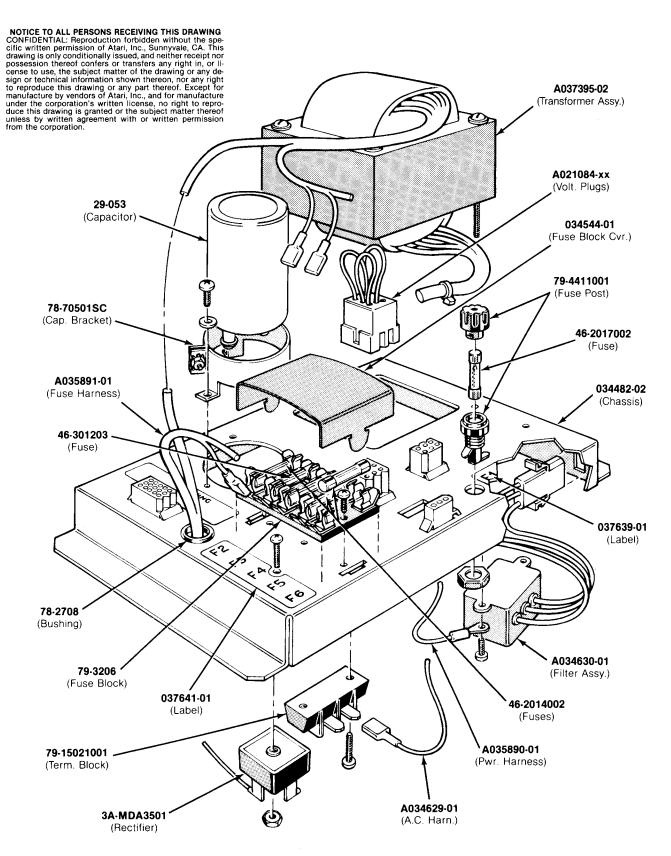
Shielded Color X-Y Power Supply Assembly A037875-xx A
